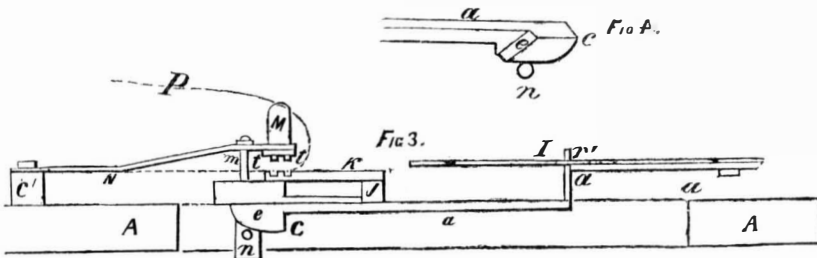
is a section of the platform; I is a metal plate; r' is a pin by which this plate is moved by the arm below; a a a are metal bars attached to the plate, I. C is the thick end of the bar made like a door latch-knob, e; n is a pin over which the latch passes to bring down the crumper; N is a spring to throw the
